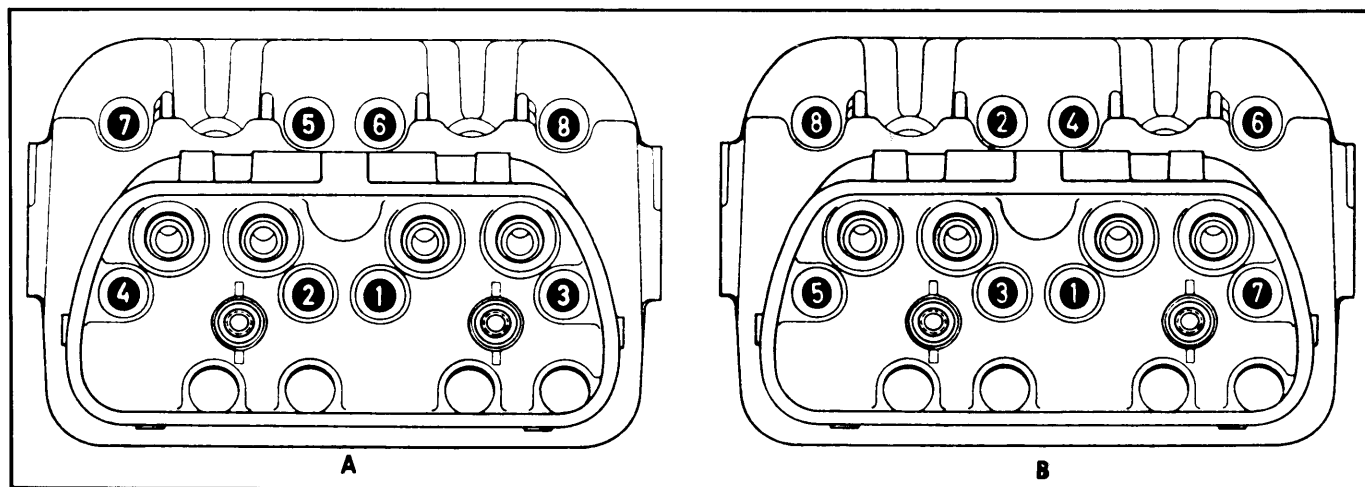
Initial (A) and Final (B) Cylinder Head Tightening Sequence
